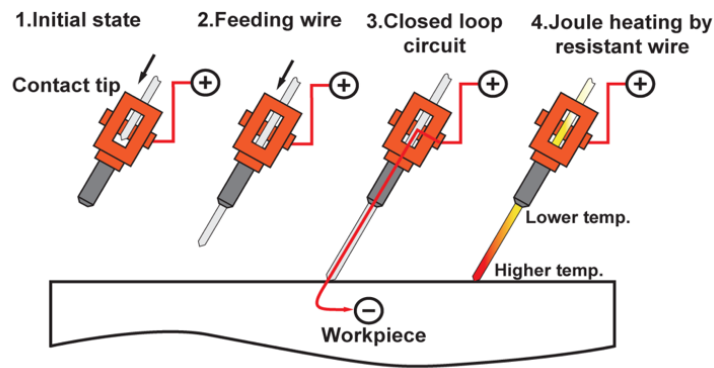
Schematic of a hot-wire system. (Reprinted from Rittichai et al [22])
